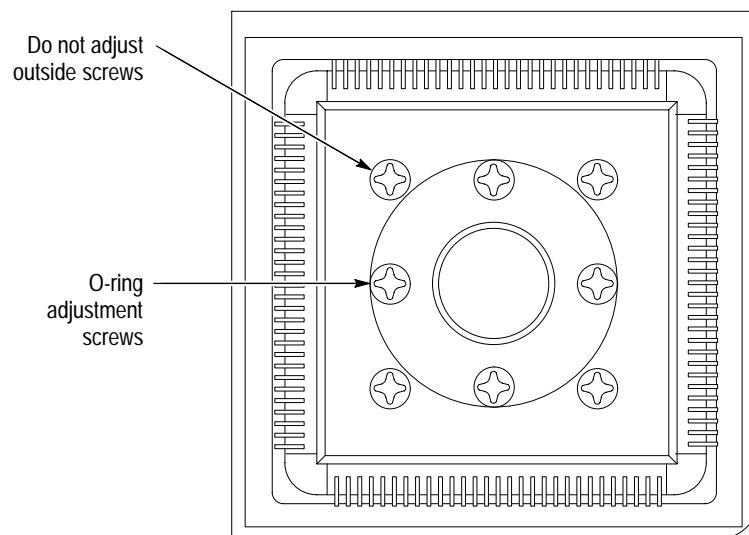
Adjusting the friction of the O-ring in the converter clip
